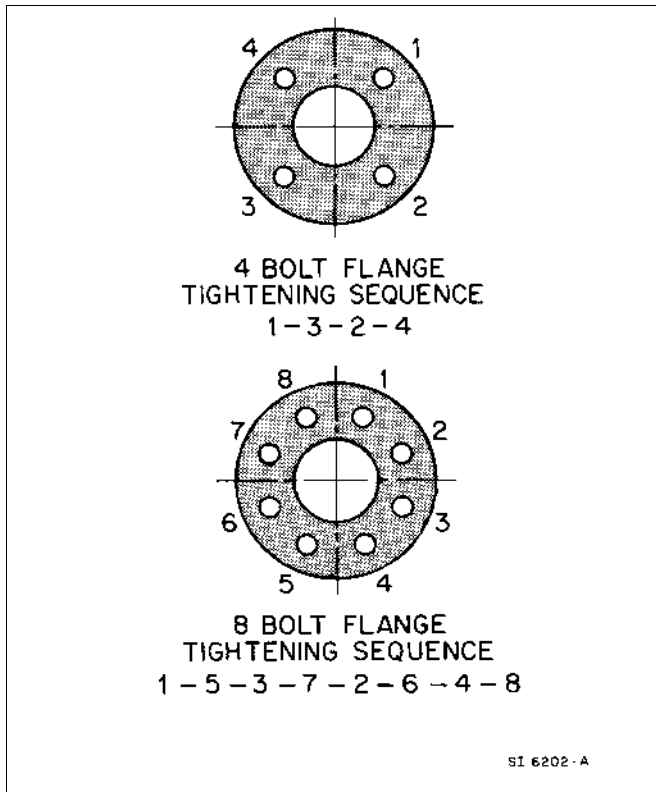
RECOMMENDED FLANGE BOLT TIGHTENING SEQUENCE
